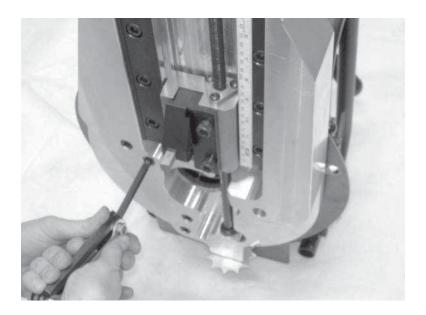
Loosen the 6 screws holding the single-point slide.
